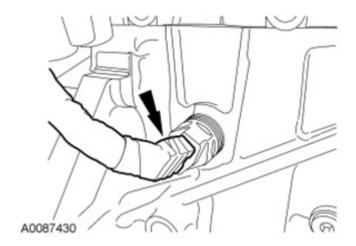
Locating Heater Hose Clamps Courtesy of FORD MOTOR CO.
